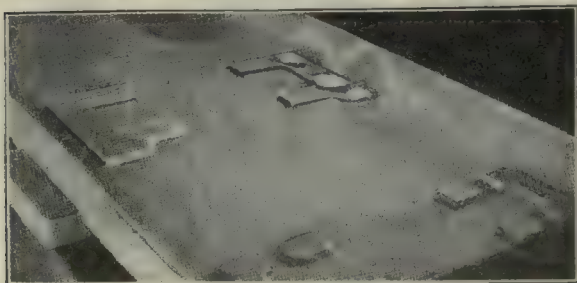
WELDED BLOWHOLES IN LATHE PAN
